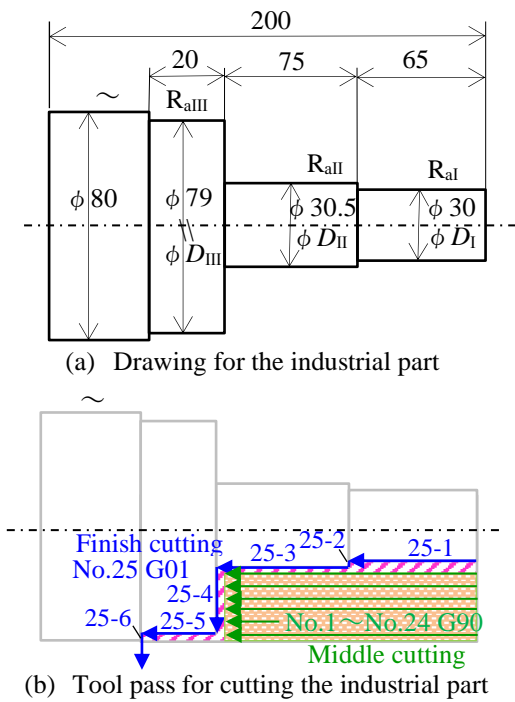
A drawing and a tool pass of the industrial part for evaluation of the proposed method (Workpiece: S45C, Insert: Carbide)
